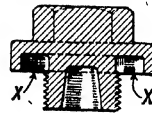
A.—SECTION OF BOILER FILLER PLUG
